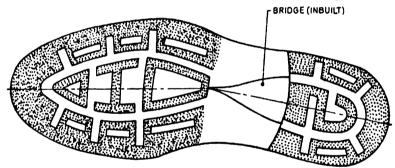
DESIGN OF A DIRECT MOULDED RUBBER SOLE AND HEEL WITH BRIDGING SUPPORT
